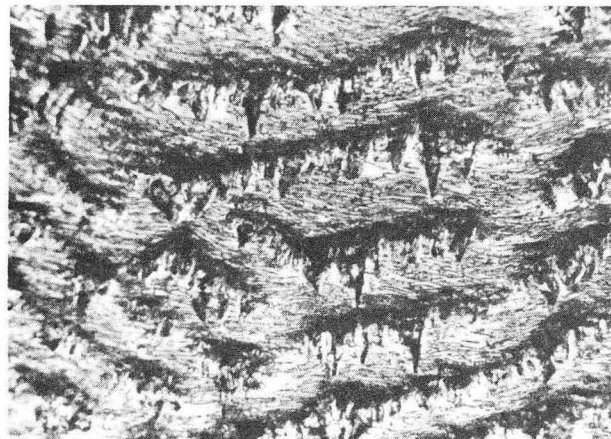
Fracture surface of acrylic SEN specimen tested at 348°K and 0.2 cm/min.
